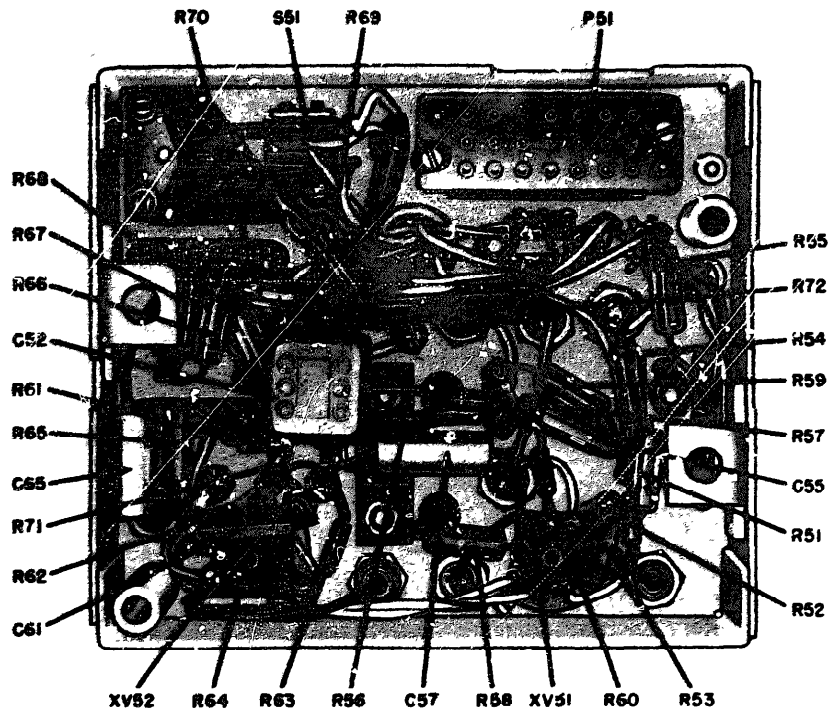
Transmitting or receiving amplifier plug-in assembly, bottom view, circuit element location diagram.
